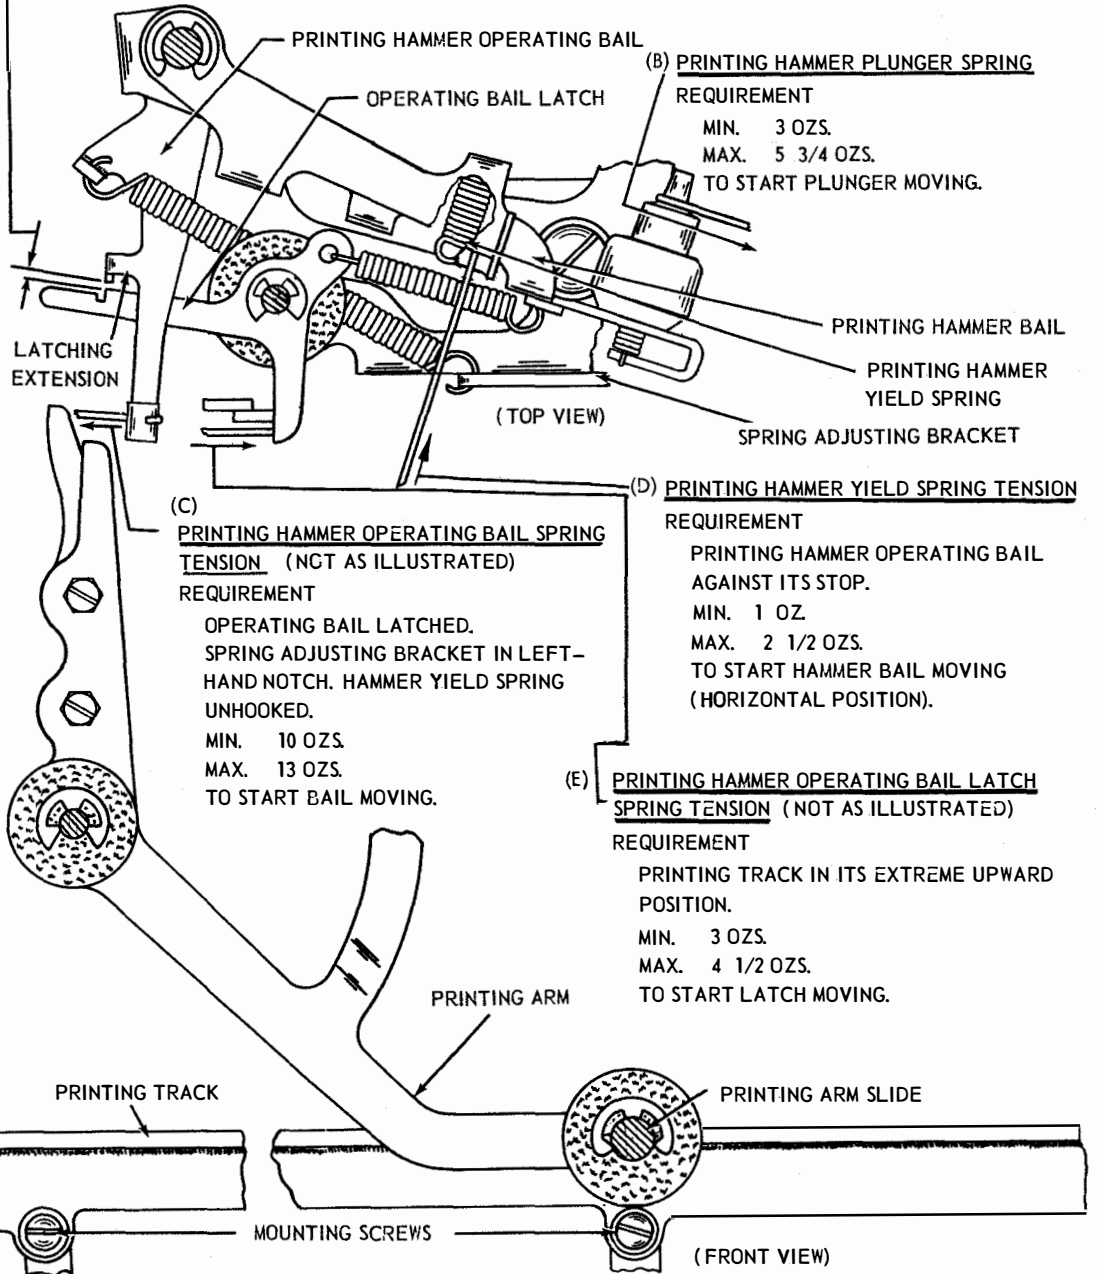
TYPING UNIT, PRINTING MECHANISM
